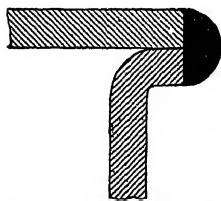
Type of Arc Weld Not Requiring Additional Electrode Material
